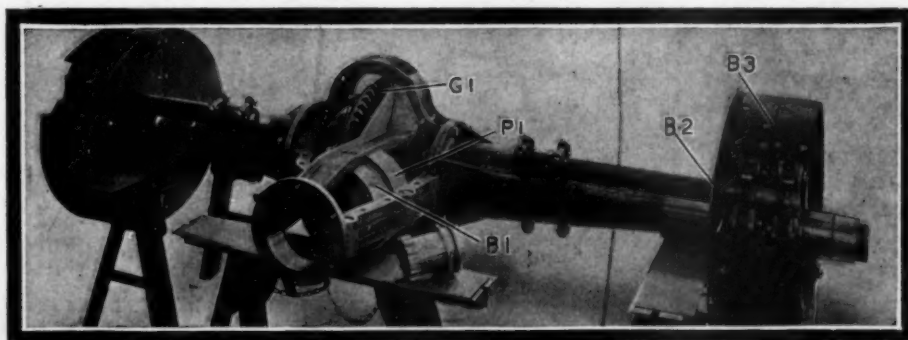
Live rear axle partly assembled, showing the bevel drive, stub shaft and brake bands alongside of each other, of the internal expanding type
